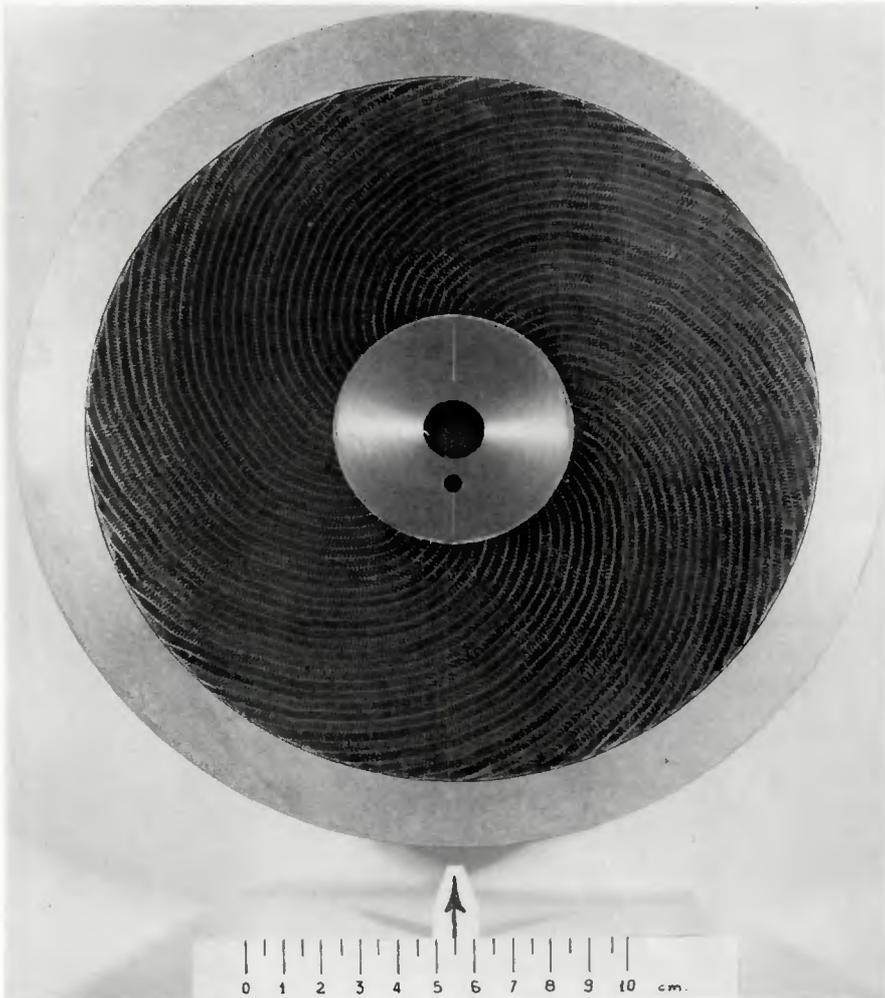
Brazed rotating heat exchanger with a 230 mm outer diameter
